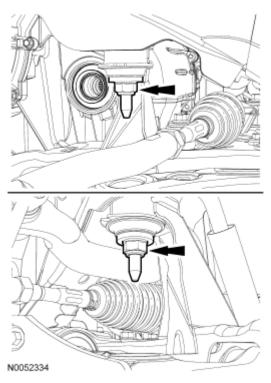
Identifying M6 Bolt Courtesy of FORD MOTOR CO.
